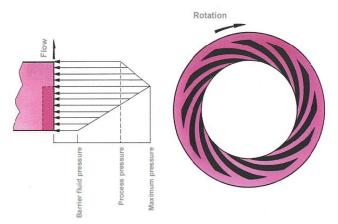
Mating Ring with Spiral Groove and its Pressure Profile (courtesy of John Crane)
